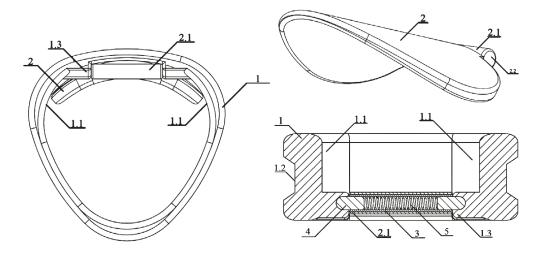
Design for the single-leaf mechanical heart valve developed here: 1) housing; 1.1) inner support ledges; 1.2) groove; 1.3) slots; 2) leaf; 2.1) fastening; 2.2) aperture; 3) tube; 4) spring; 5) pin [9].
